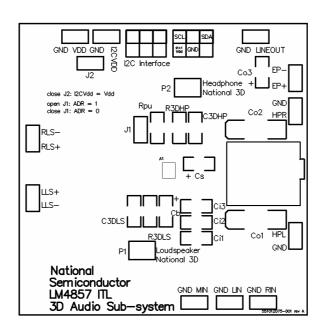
Recommended ITL PCB Layout Top Silkscreen
